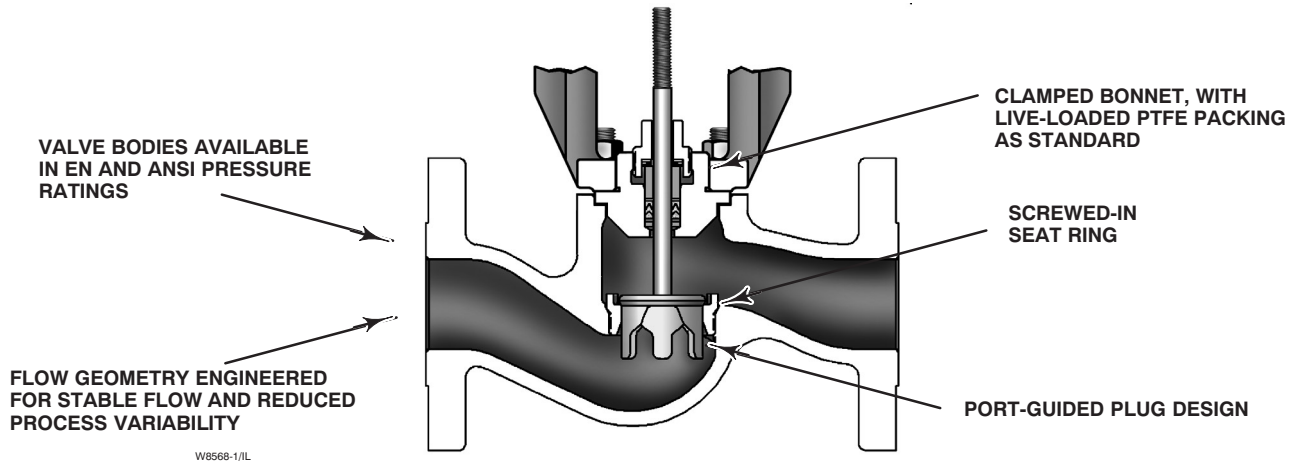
Design GX Control Valve with Port-Guided Plug (Sizes DN 40 to 100/1.5 to 4-Inch)
